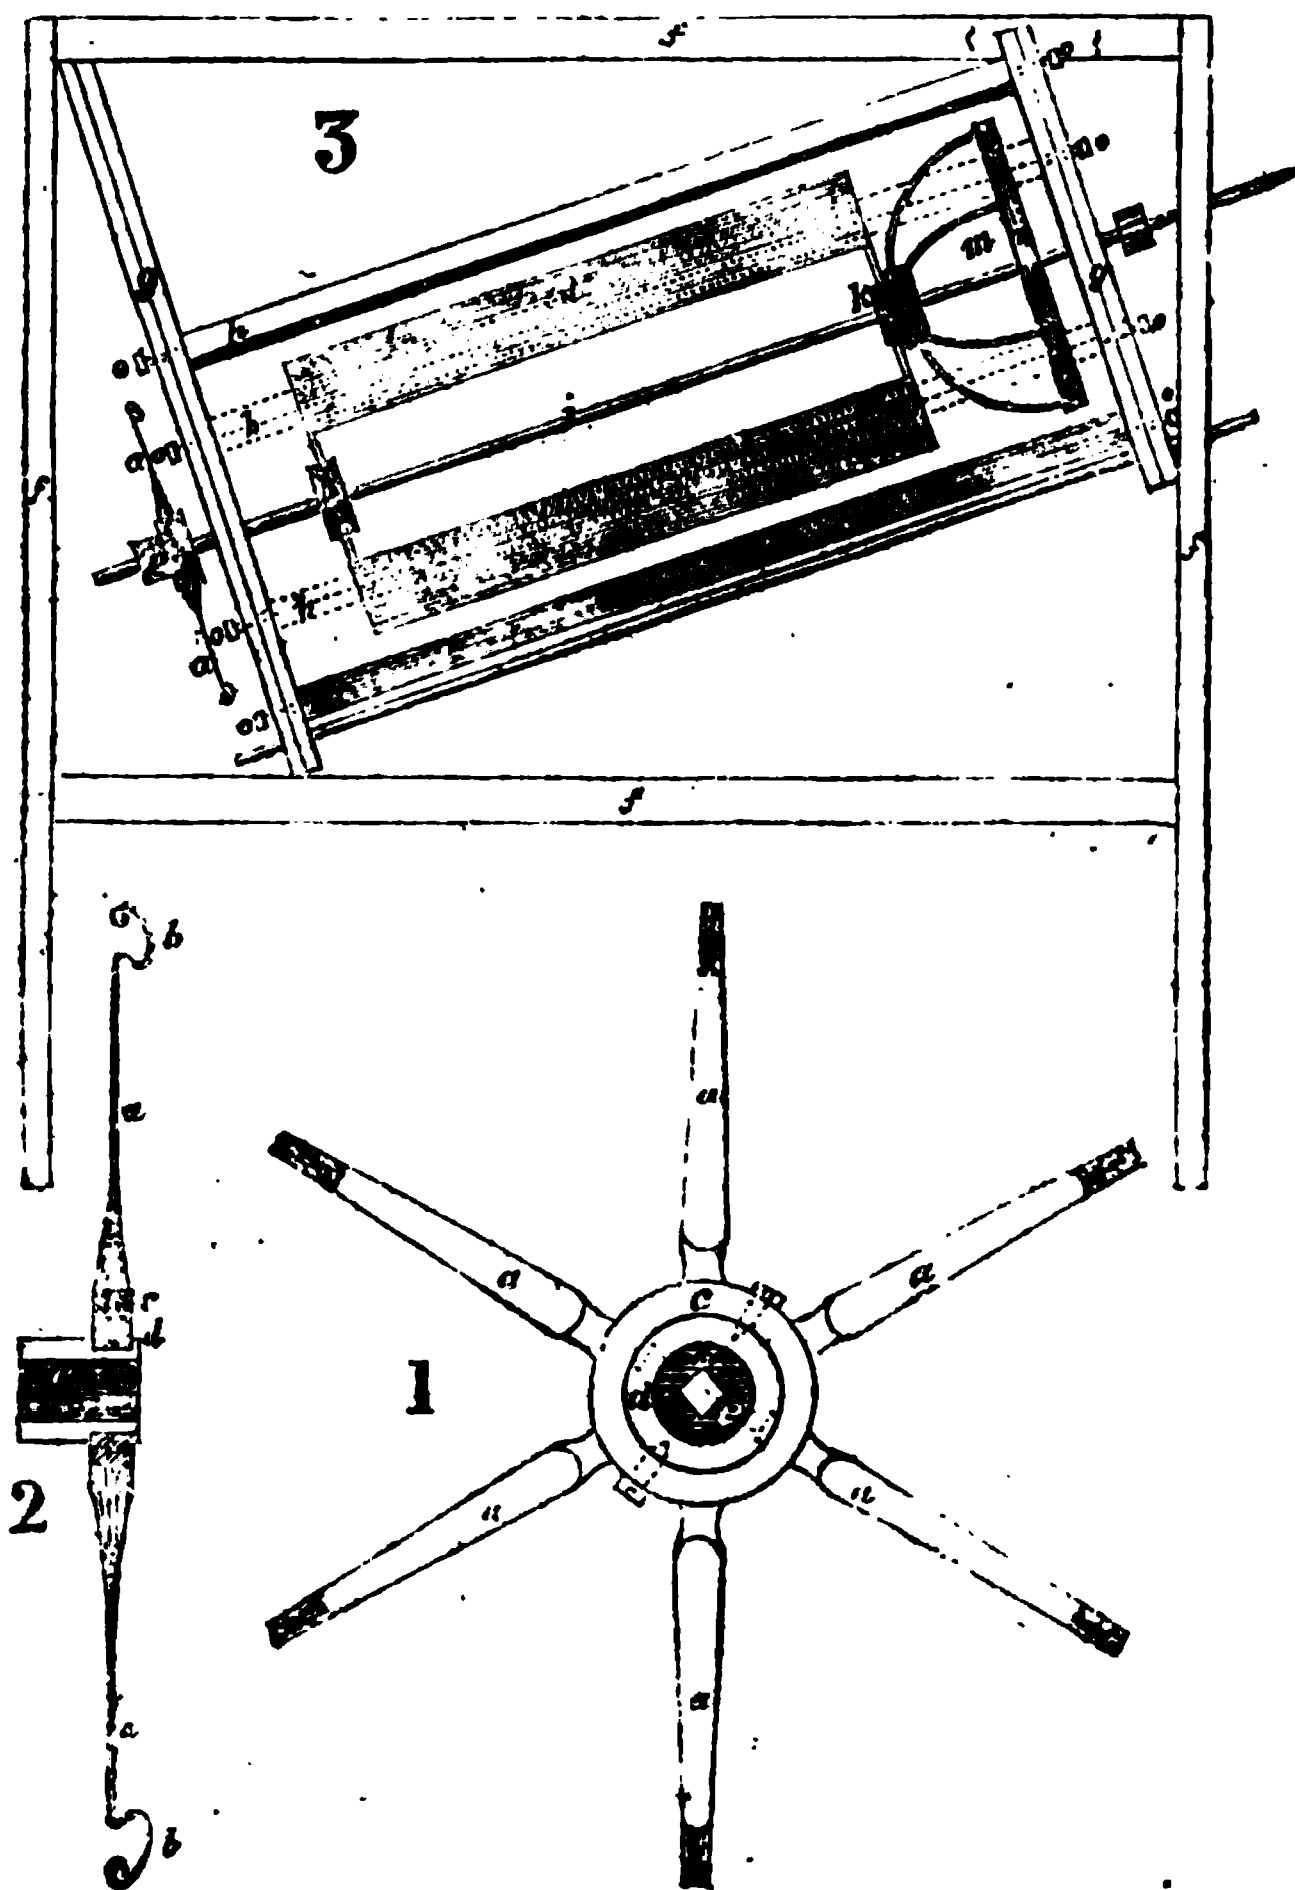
is a plan or front view of the six steel arms or springs, *a a a a a a*, riveted to a ring of metal *C*. Fig. 2. gives a section of Fig. 1.; and Fig. 3. gives a side view of an improved bolting machine complete, excepting that certain obvious parts are removed to prevent obstruction to the light. The letters in each Fig. refer to similar parts.
